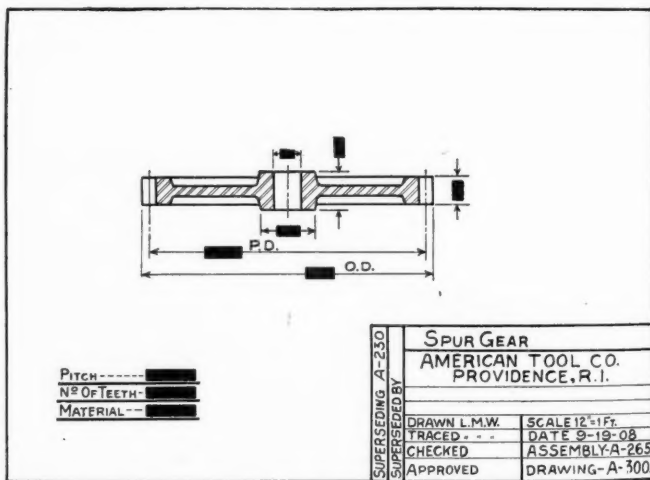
Printed Sheet with Representation of Commonly used Part and Blank Spaces to be filled in by the Draftsman
